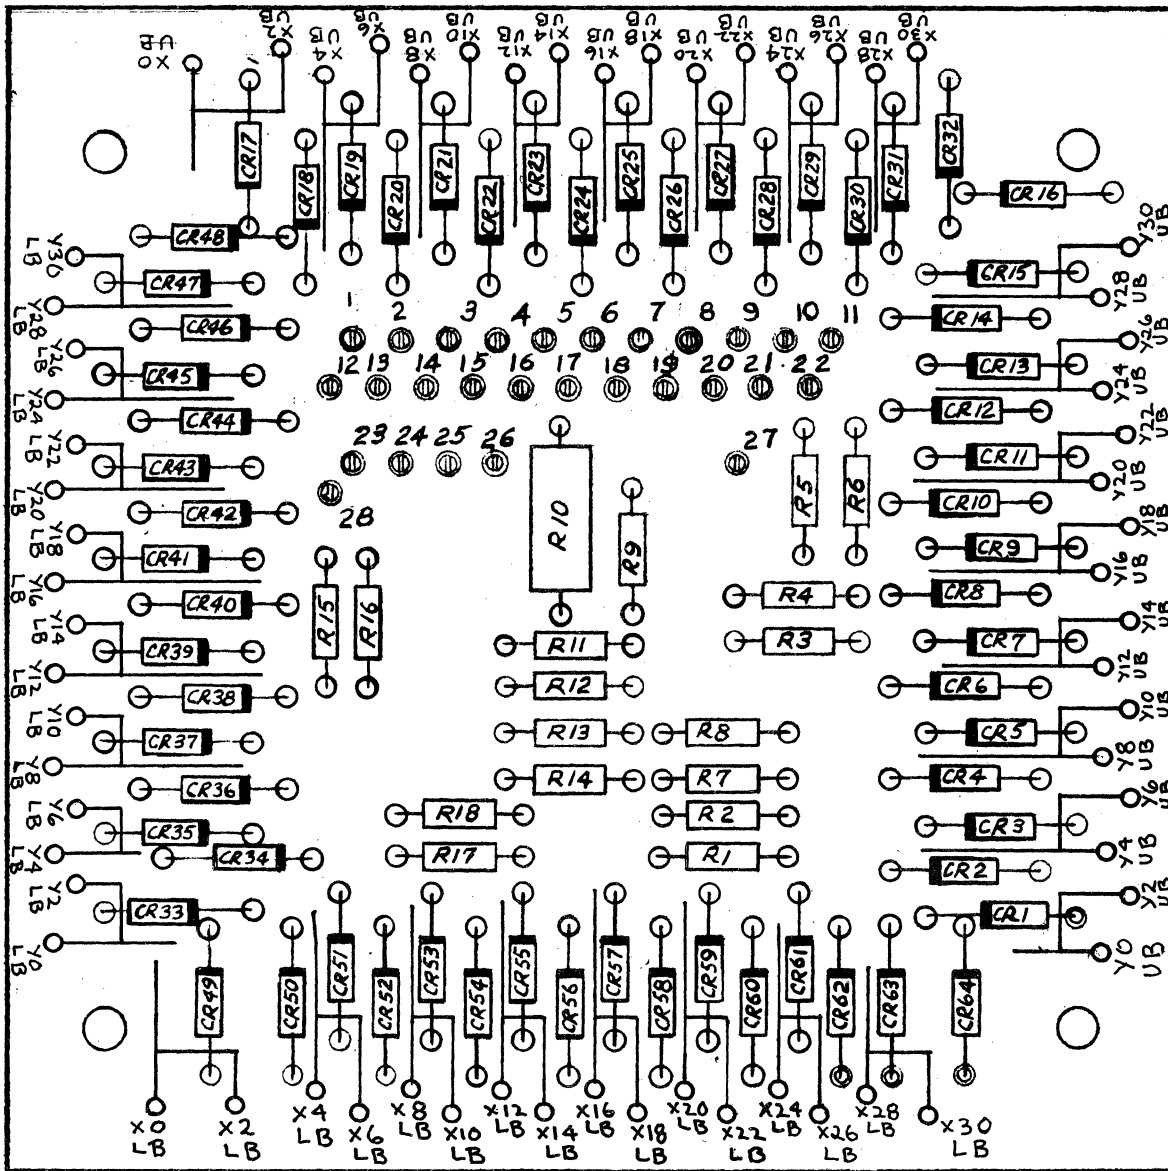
Top End Plate, Matrix Module, Assembly 11933
